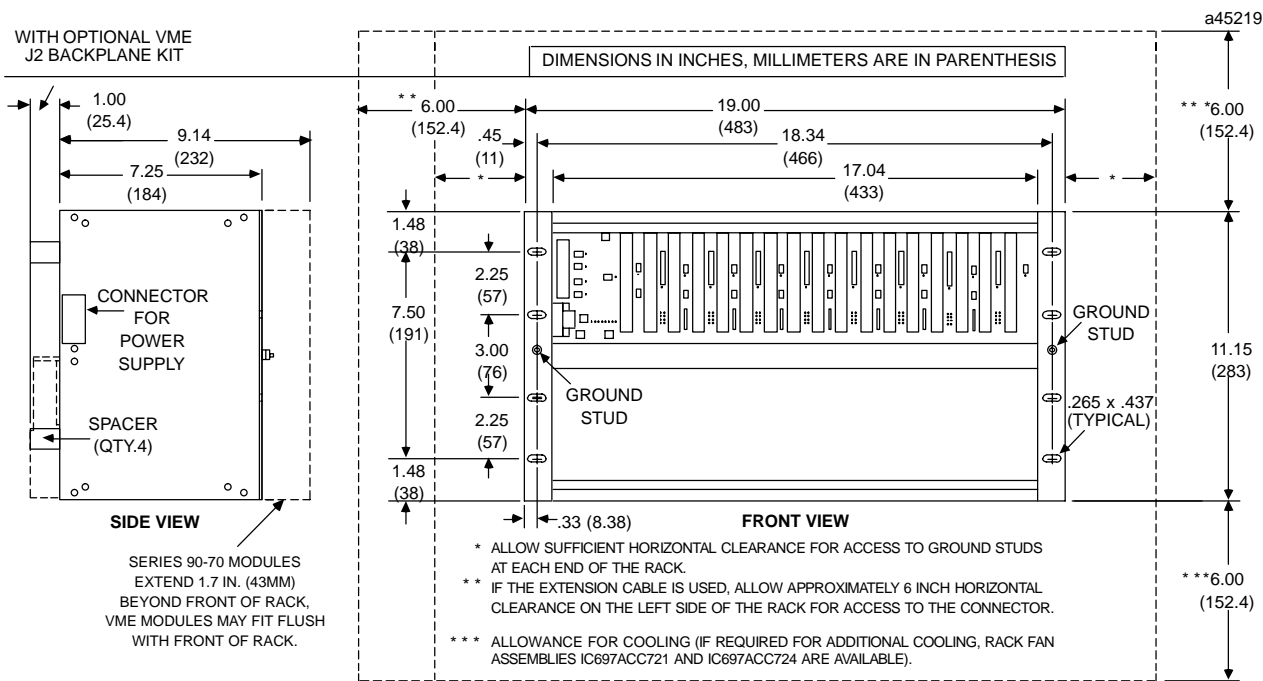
VME Integrator Rack Mounting Dimensions and Requirements for Front (Rack) Mount Installation
